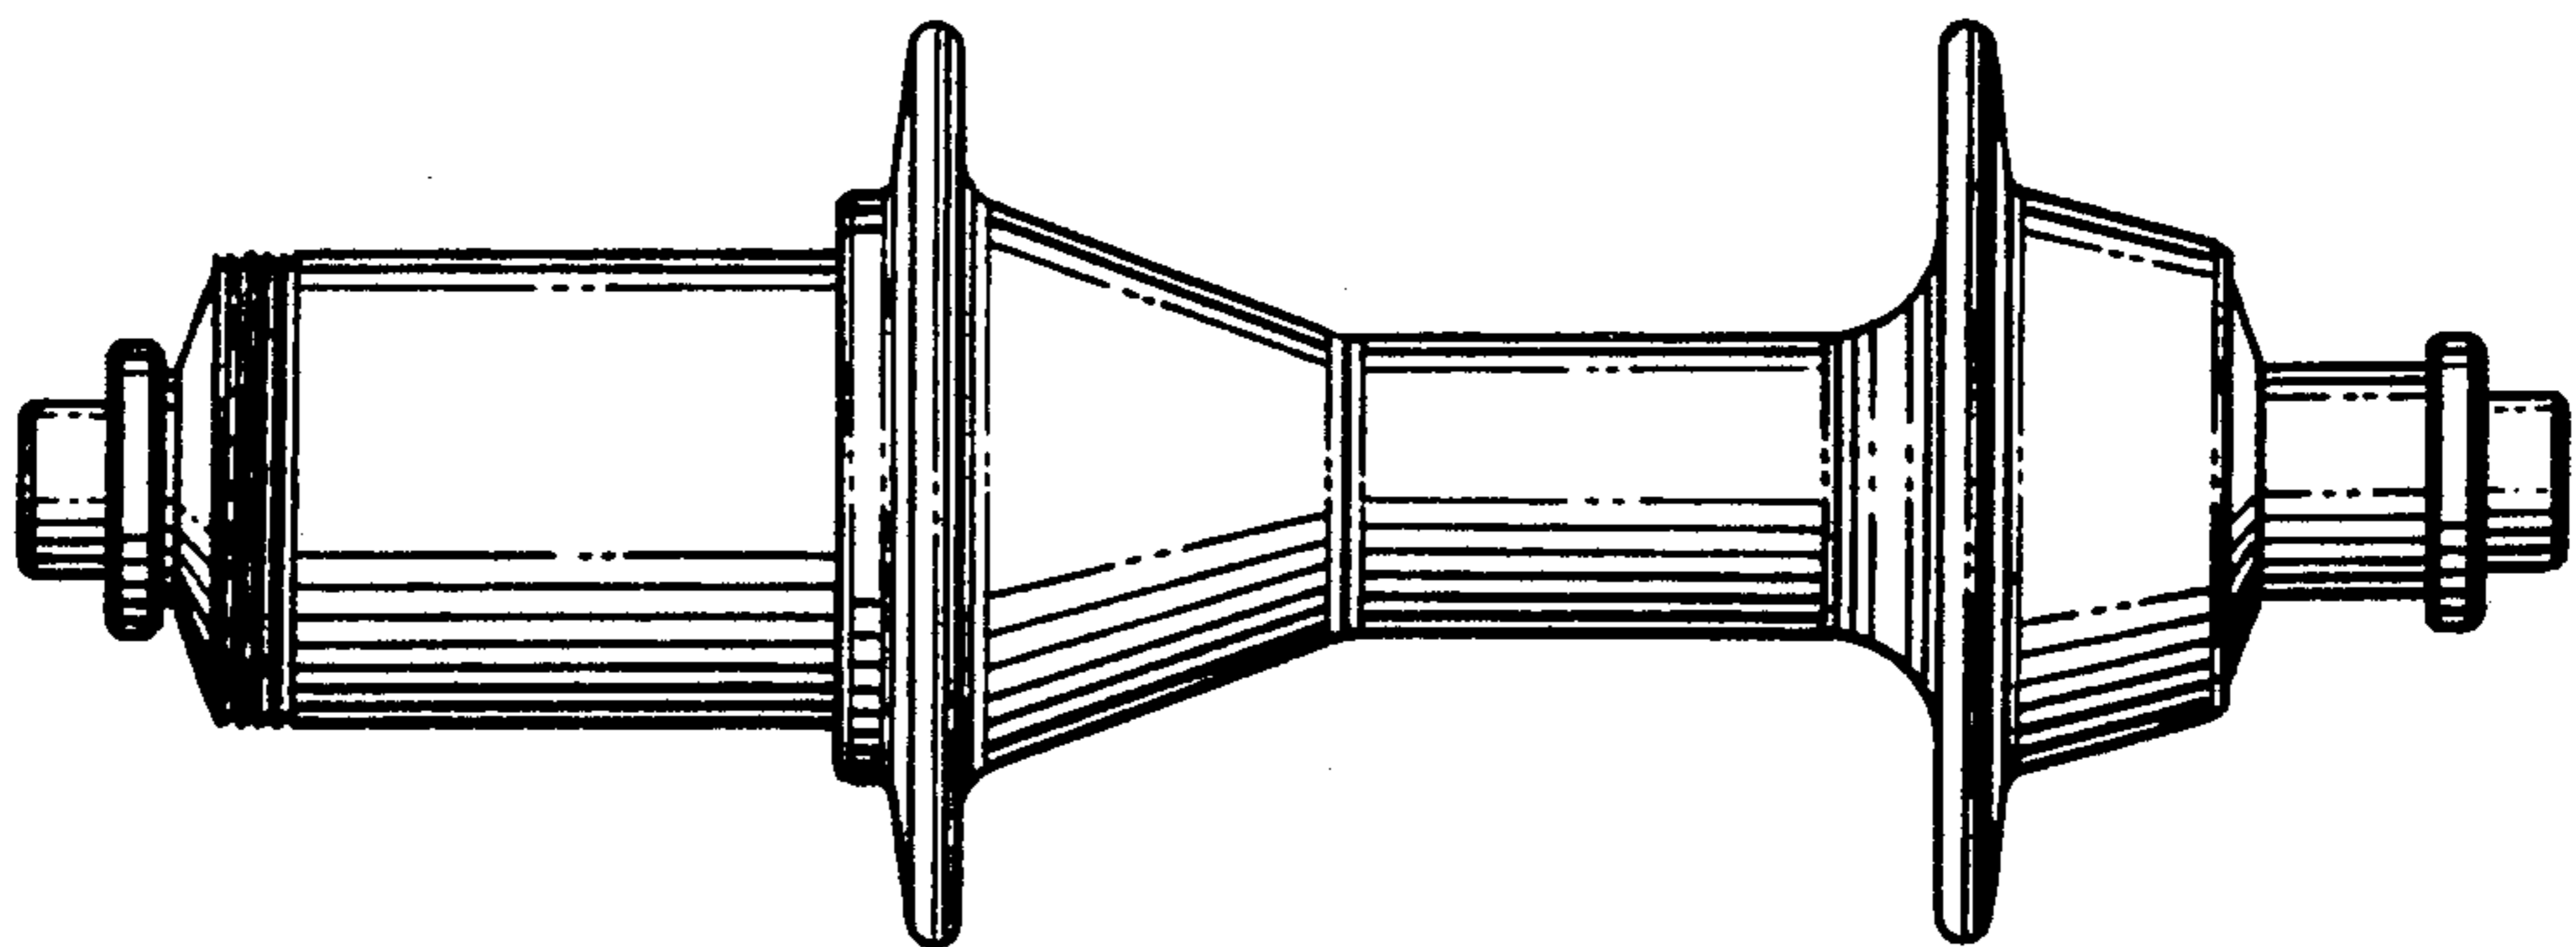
is an isometric view of a hub unit for the rear wheel of a geared bicycle;
